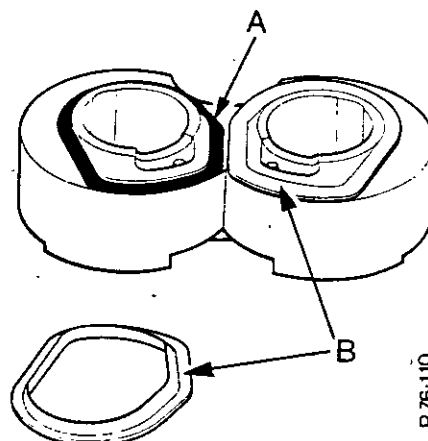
ASSEMBLY OF THE PUMP BEARINGS AND SEALS
